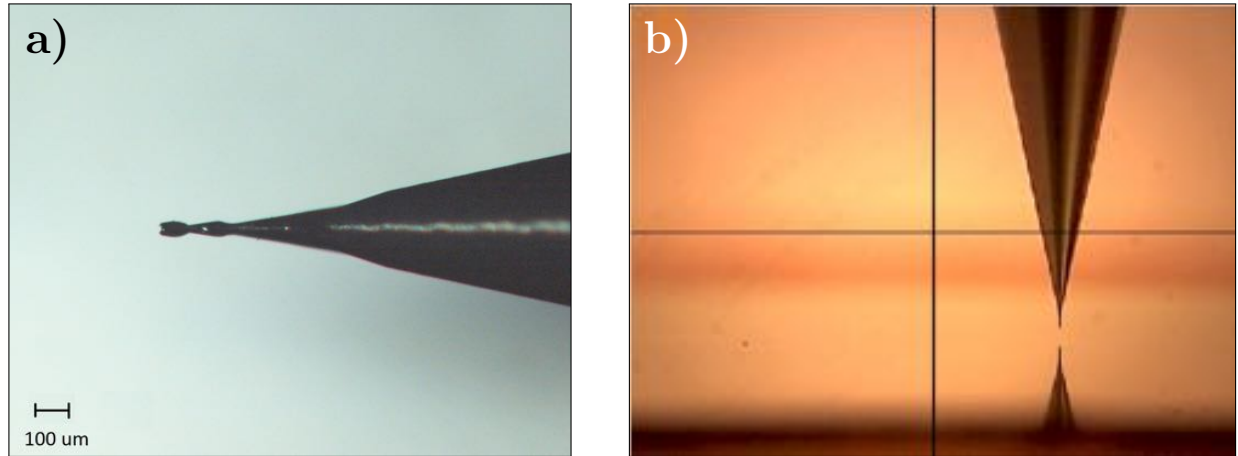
Images depicting the micro-cutter used to fabricate the 3ω shadow mask. a) An optical micrographs of a $50\ \mu\text{m}$, two cutter, fish-tail end-mill. b) The end-mill on the CNC mini-mill, approaching the surface of the brass shim. The reflection of the end-mill in the shim assists with the approach.
